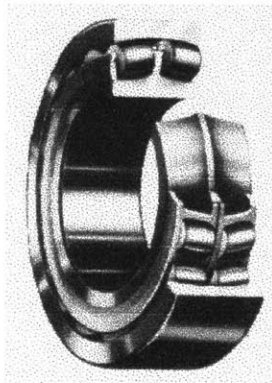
Spherical Roller Bearings. Source: NSK-RHP
